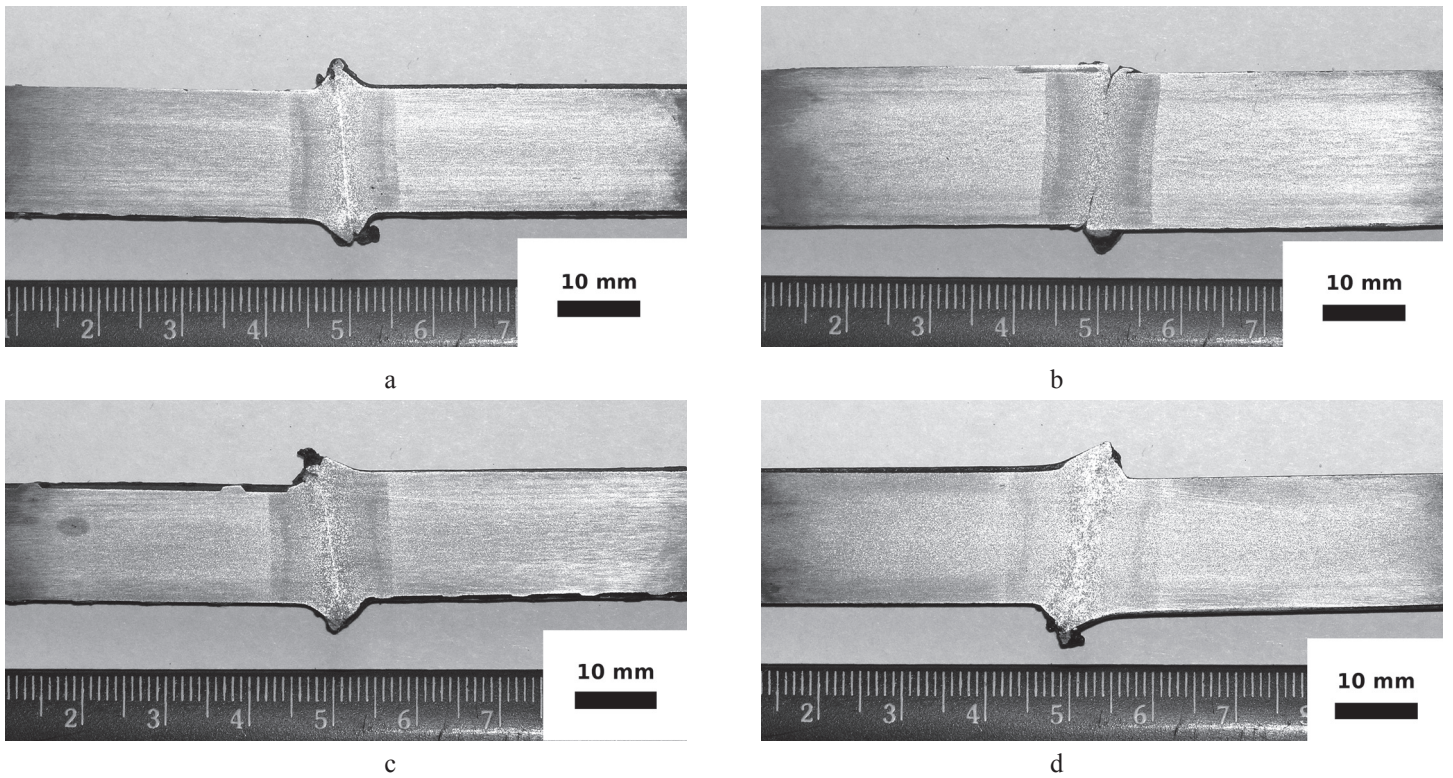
Macrosection of the joints produced under different welding conditions:
